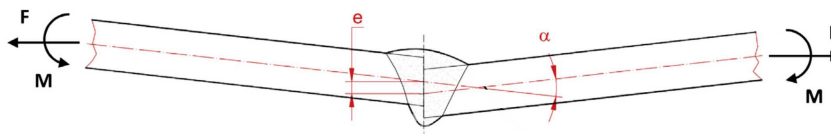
Definition of two types of joint misalignment in butt welded connection [54].
